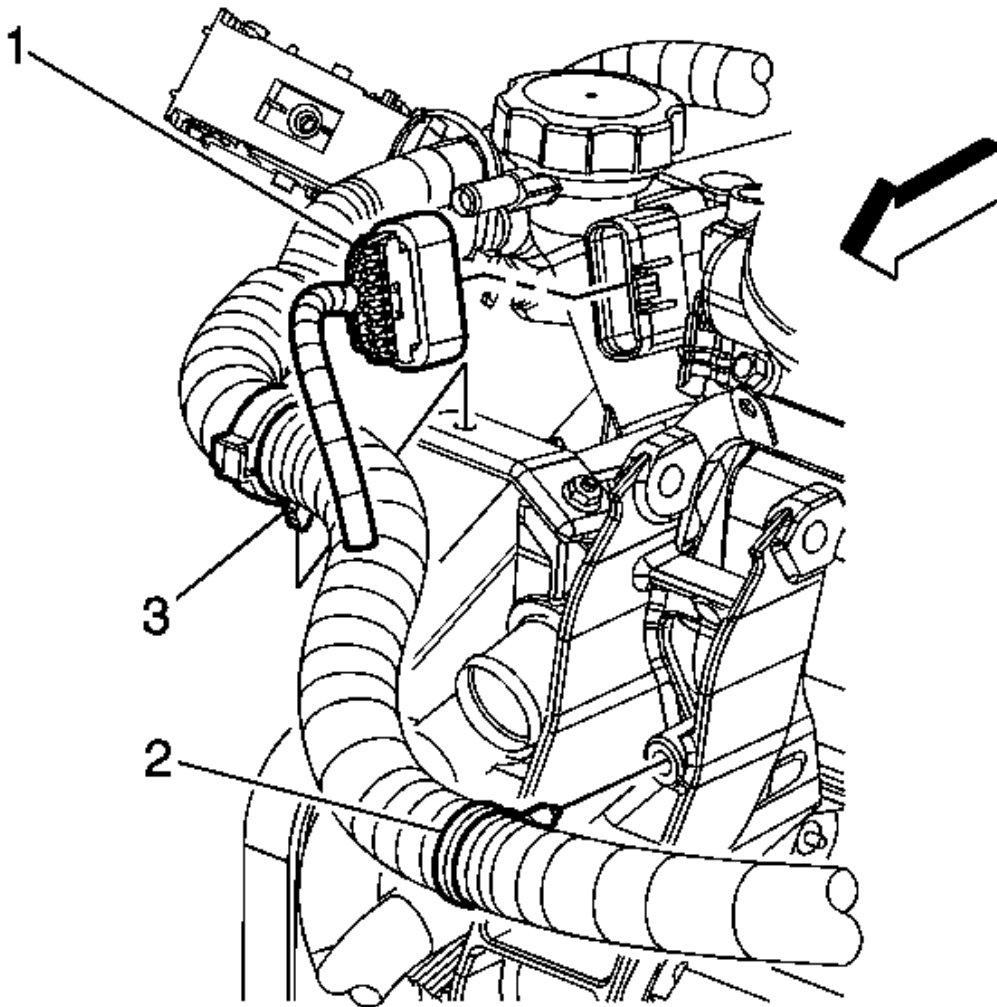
Identifying Engine Harness Clip (2) & Strut Bracket
